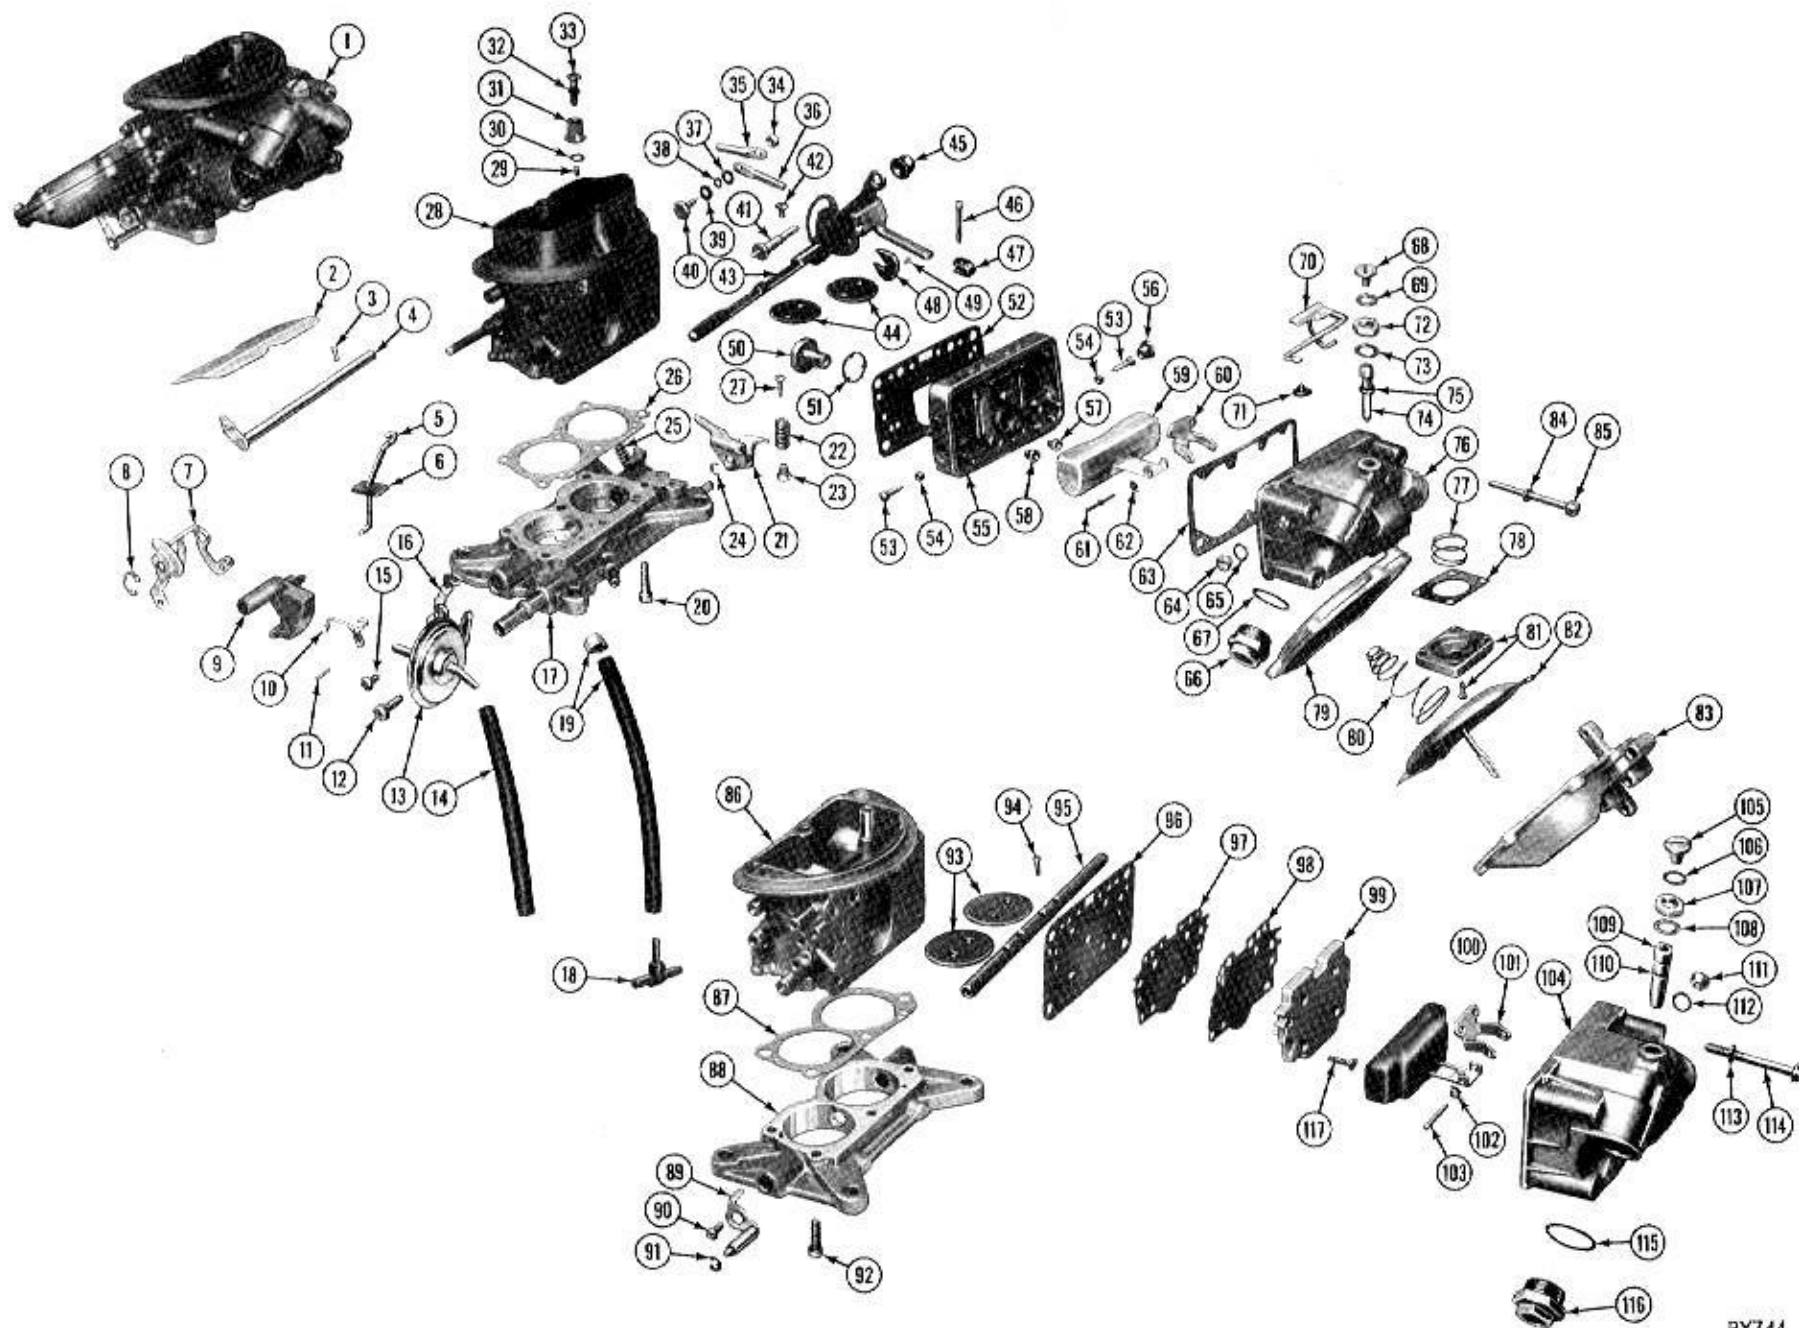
Tri-Carburetor Assemblies (Exploded View)
